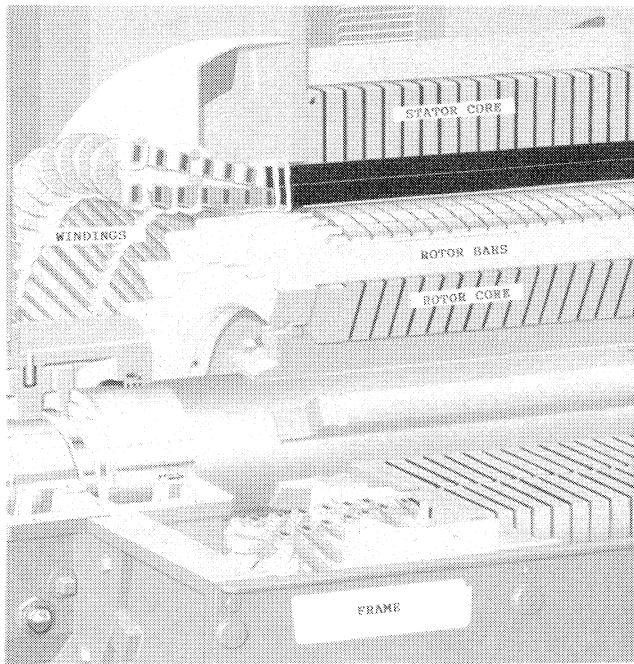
Cutaway of a Typical Large Squirrel Cage Induction Motor Outlining the Various Major Components.
